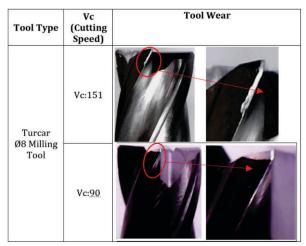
Tool wear for 45min. machining of Ø8 Turcar
